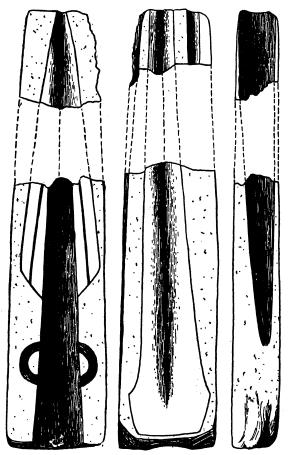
Half of mould for easting a spear-head and dagger, Killymeddy, Co. Antrim ($\frac{1}{2}$).
